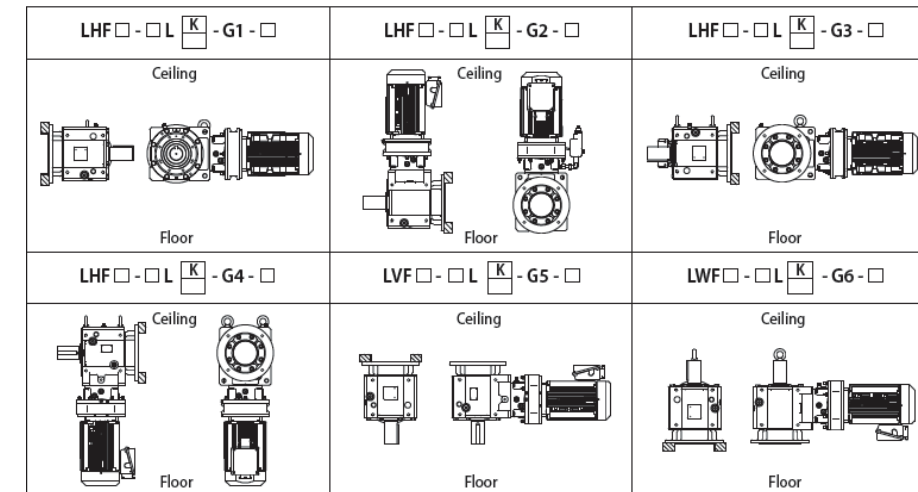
Solid Output Shaft Right (R) - Output Flange Left
